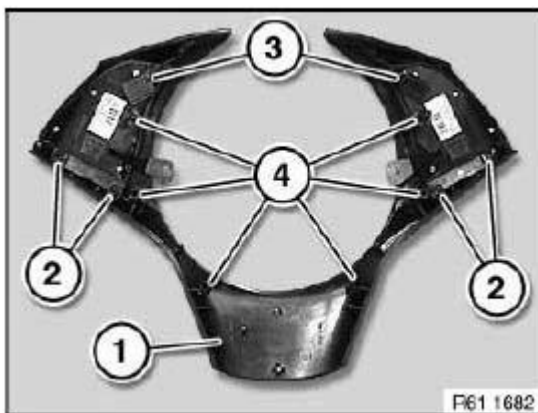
Identifying Left Multifunction Steering Wheel Switches, Screws And Guide Pins
